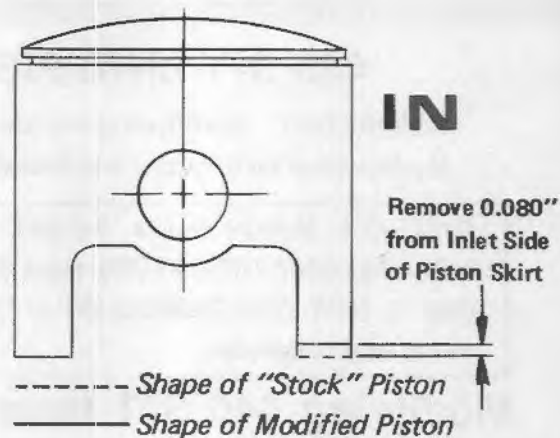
440 S/T "Modified-Stock" and "Super-Modified" Piston
